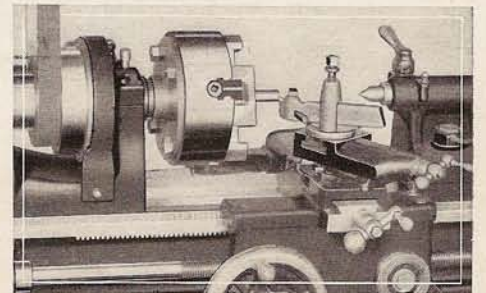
Holding Jewelers' Punch Blank in the Chuck While Machining the Shank
